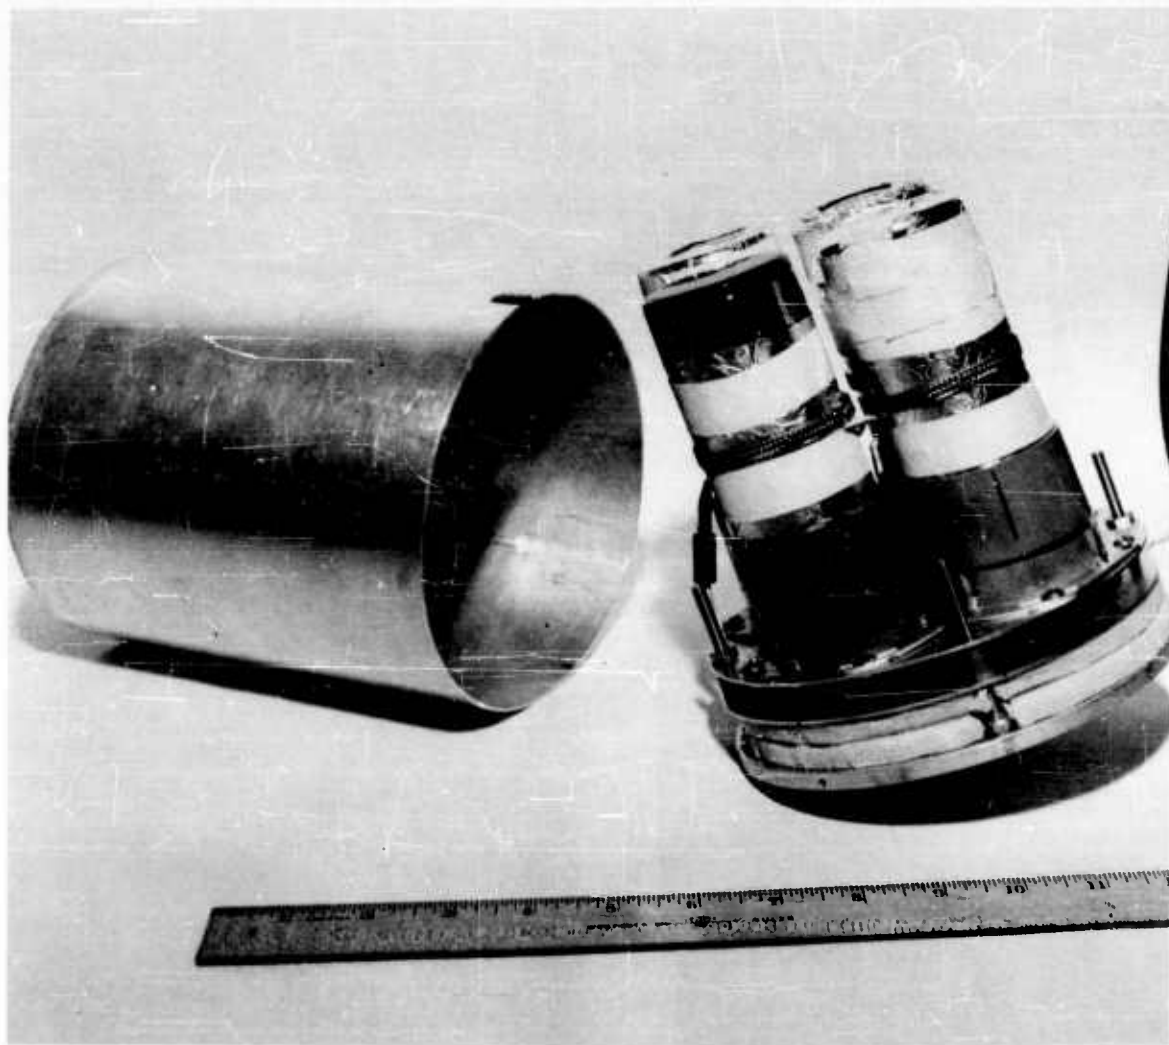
MULTIPLIER PHOTOTUBE TEST FIXTURE WITH COVER REMOVED
